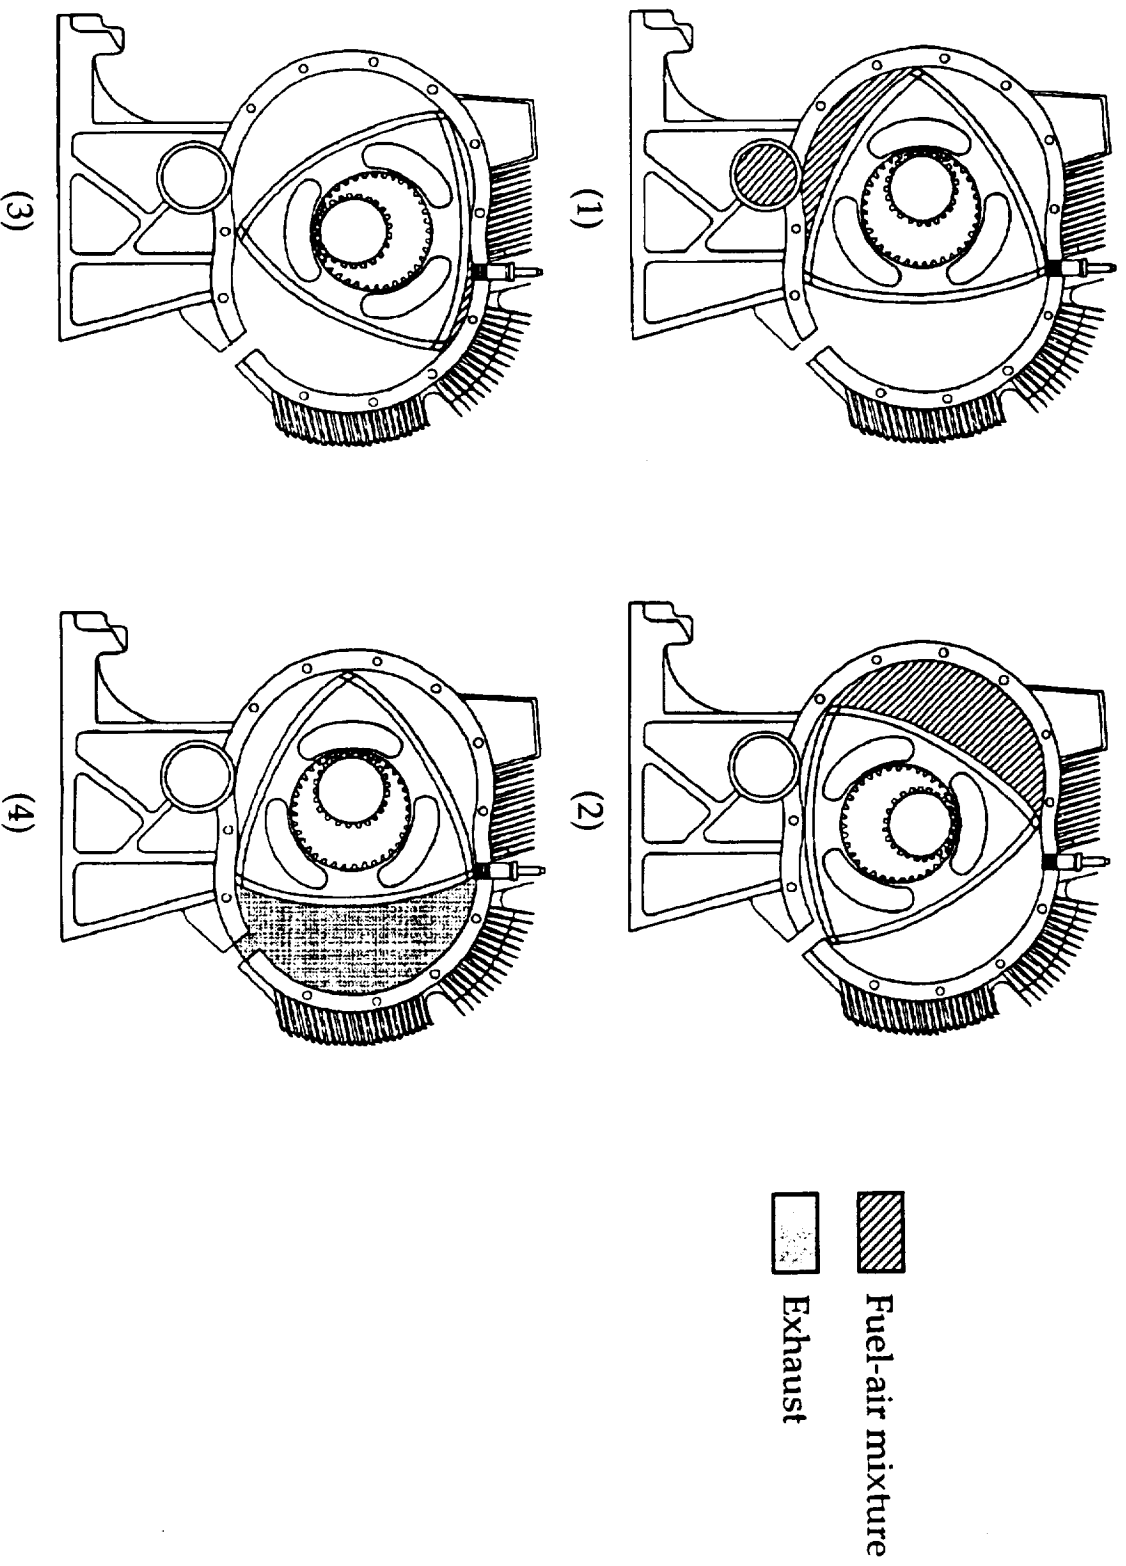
Rotary-cycle engine. (1) Intake stroke begins when rotor tip uncovers intake port. (2) Compression starts as intake port is closed and rotor reaches highest point in front of spark plug. (3) Combustion takes place when charge is most compressed. (4) Exhaust begins as rotor tip passes exhaust port.
